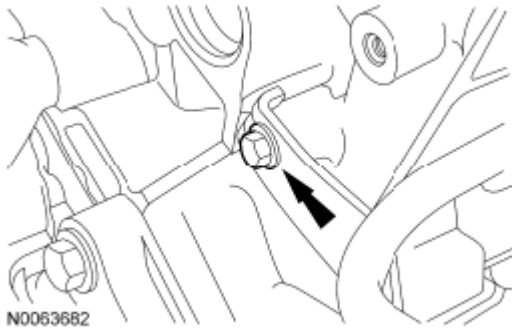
Locating Power Steering Pressure Tube & Bracket Assembly
